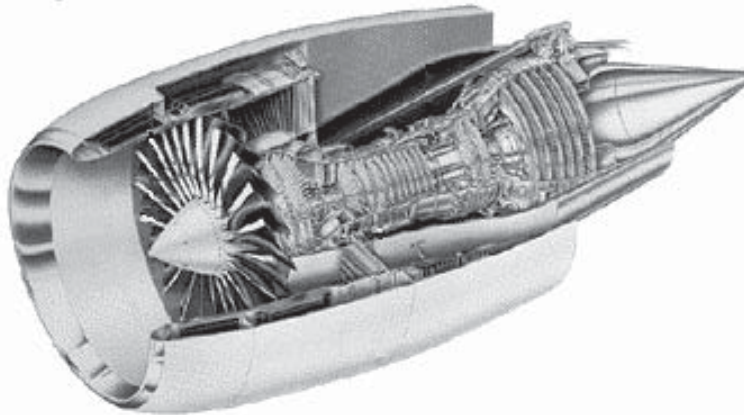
Sectional view of the GE 90, a high-bypass-ratio, two-shaft, turbofan engine rated at over 80,000 lbf thrust. Courtesy of General Electric Company.
